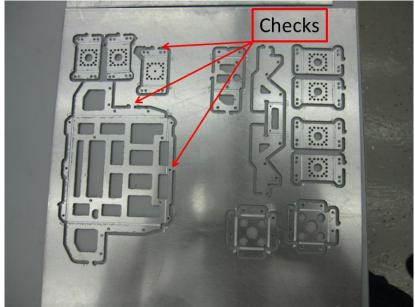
Sample parts with checks used to constrain the parts to the aluminum sheet.
